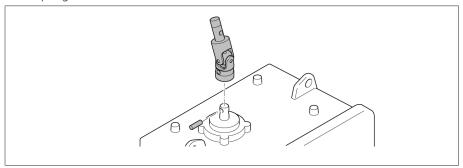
Attaching cardan joint on shaft end of motor-drive unit
